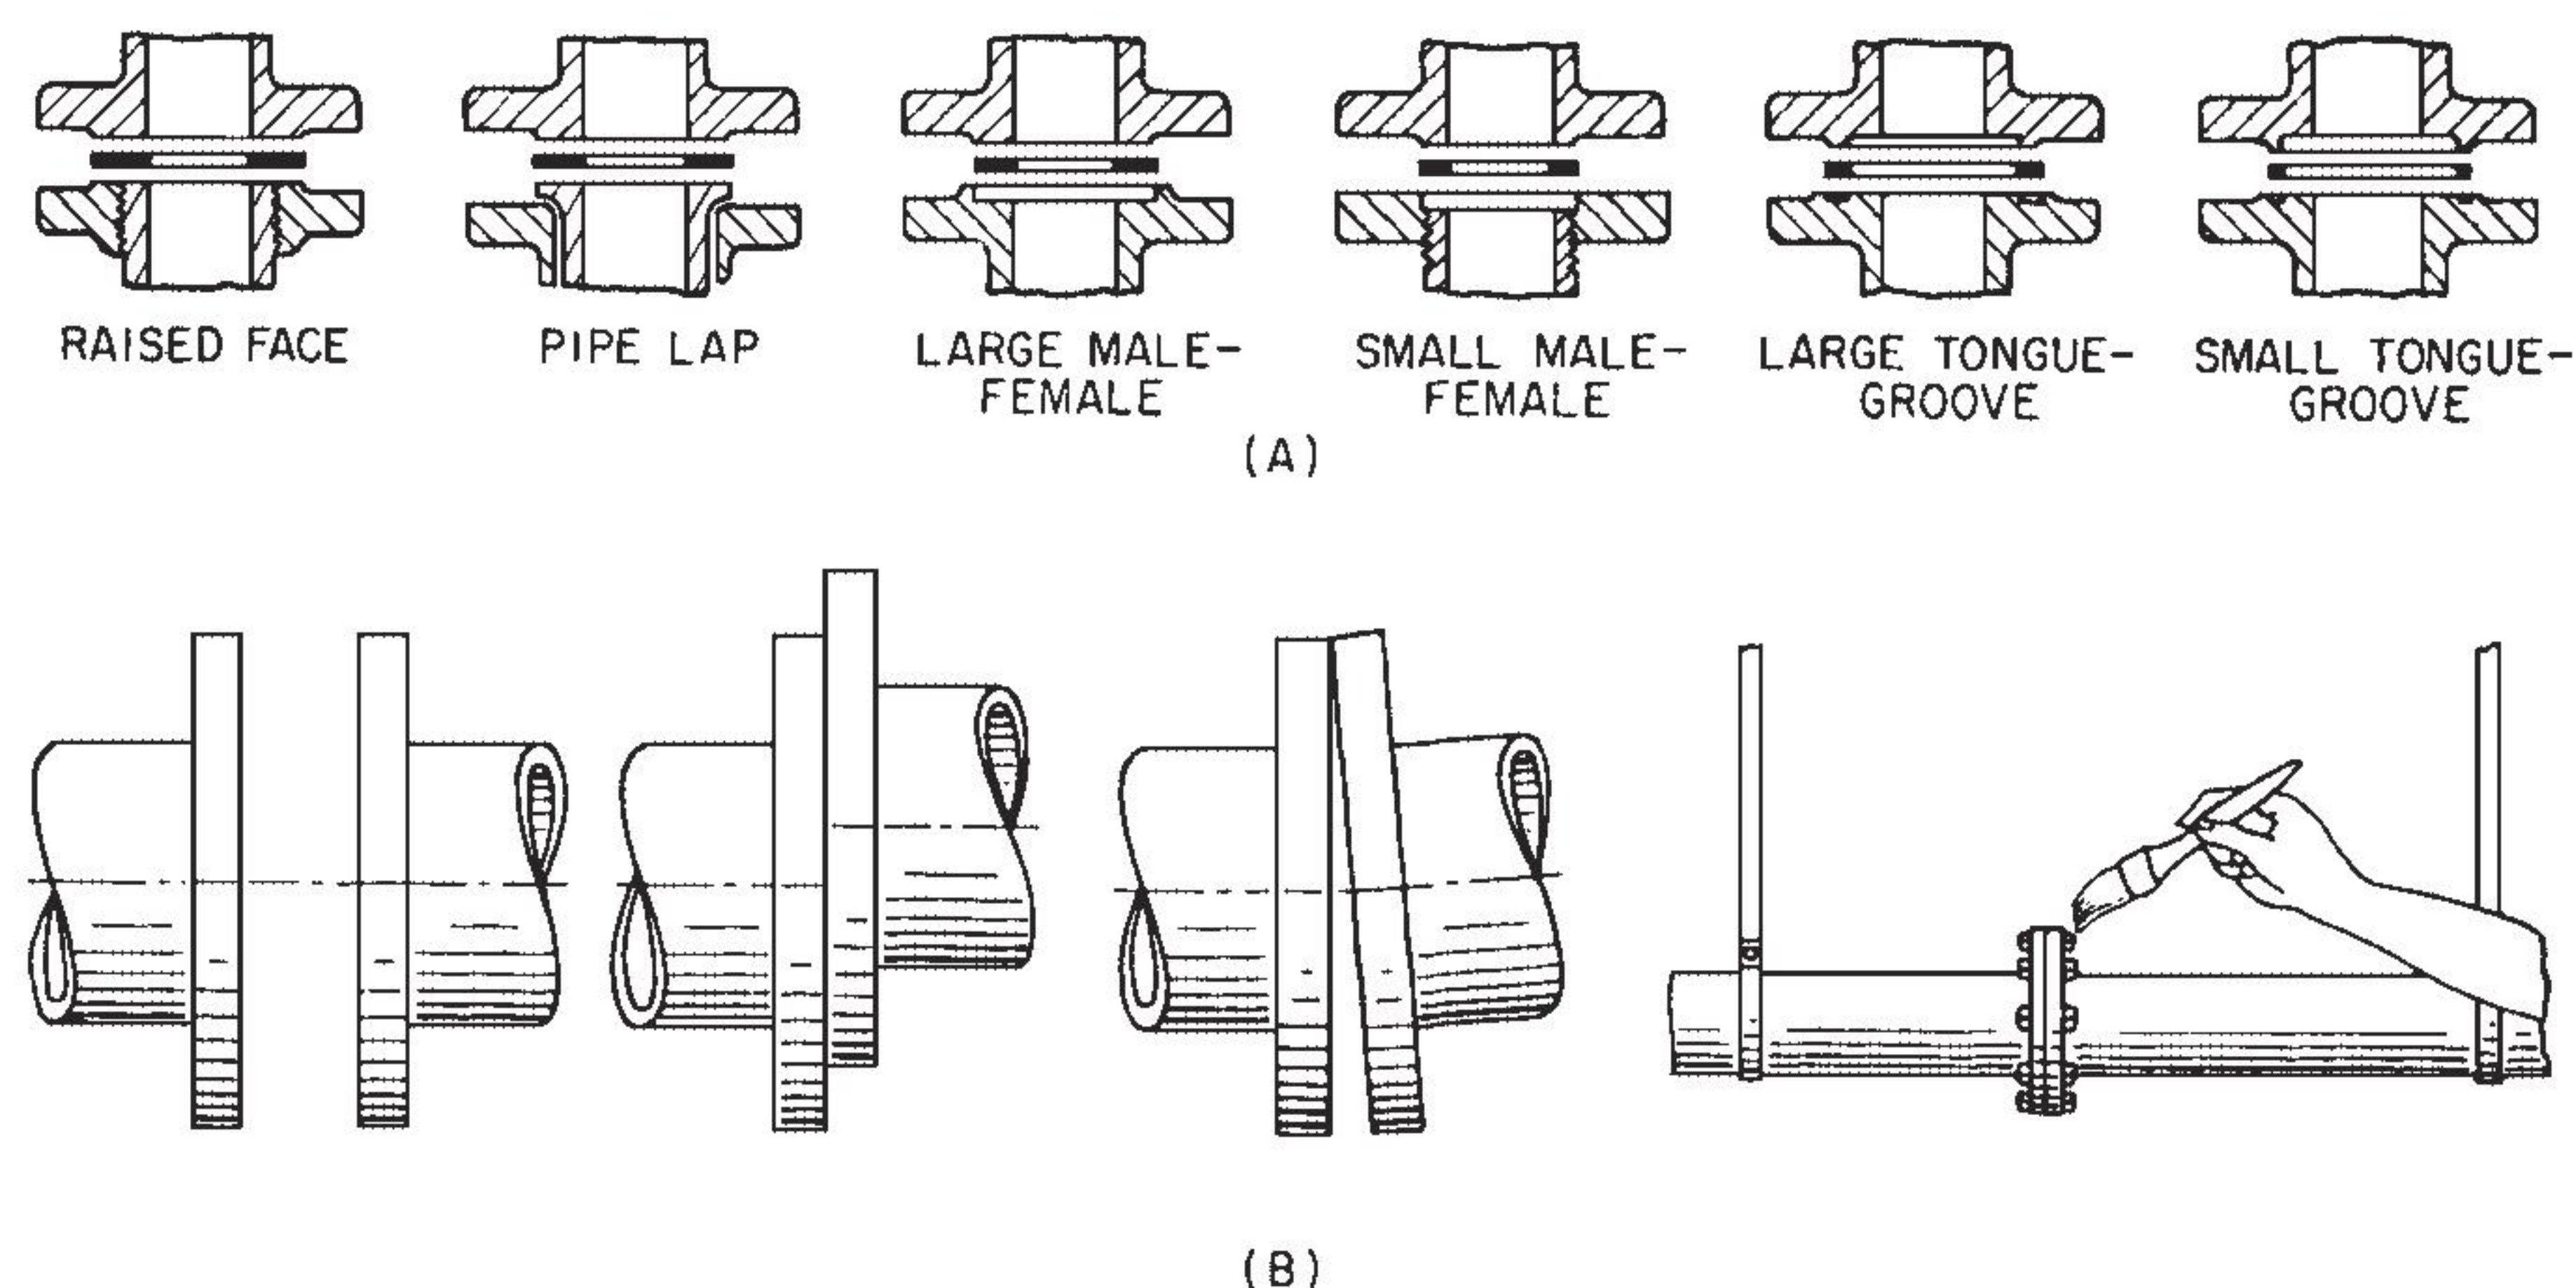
(a) Standard cast-steel flanges. (b) Align flanges to avoid trouble; careful aligning before bolting prevents excessive bolting stresses in valves, fittings, and pipe flanges. Use of thread lubricant cuts friction, protects threads, and makes joints easier to break for necessary repairs.
